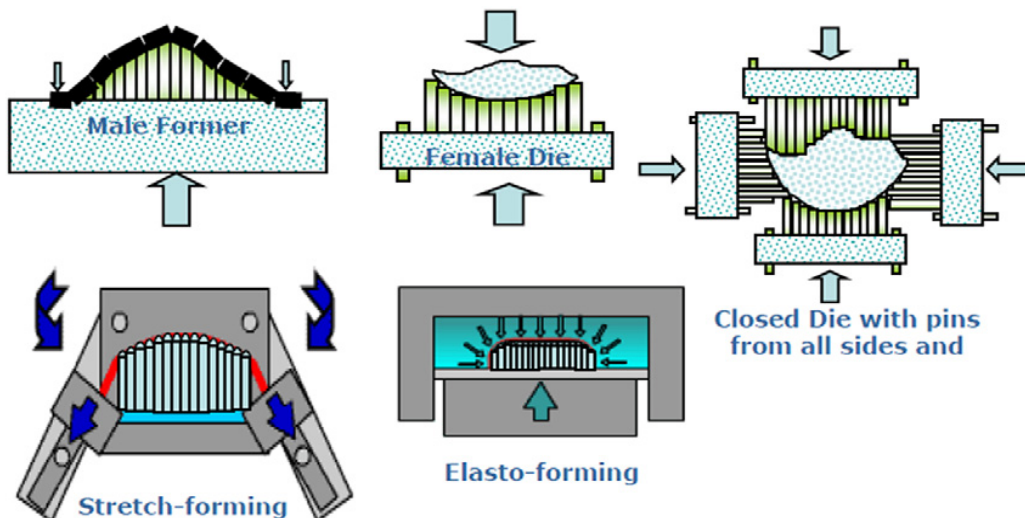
Typical pin-array fixture as one type of conformable fixtures [2]
